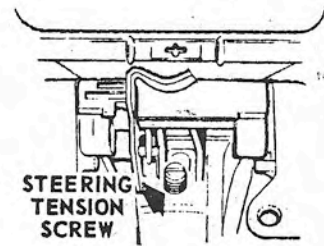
On all models except series JW, the steering tension adjusting screw is located in front of motor below the power head as shown.
